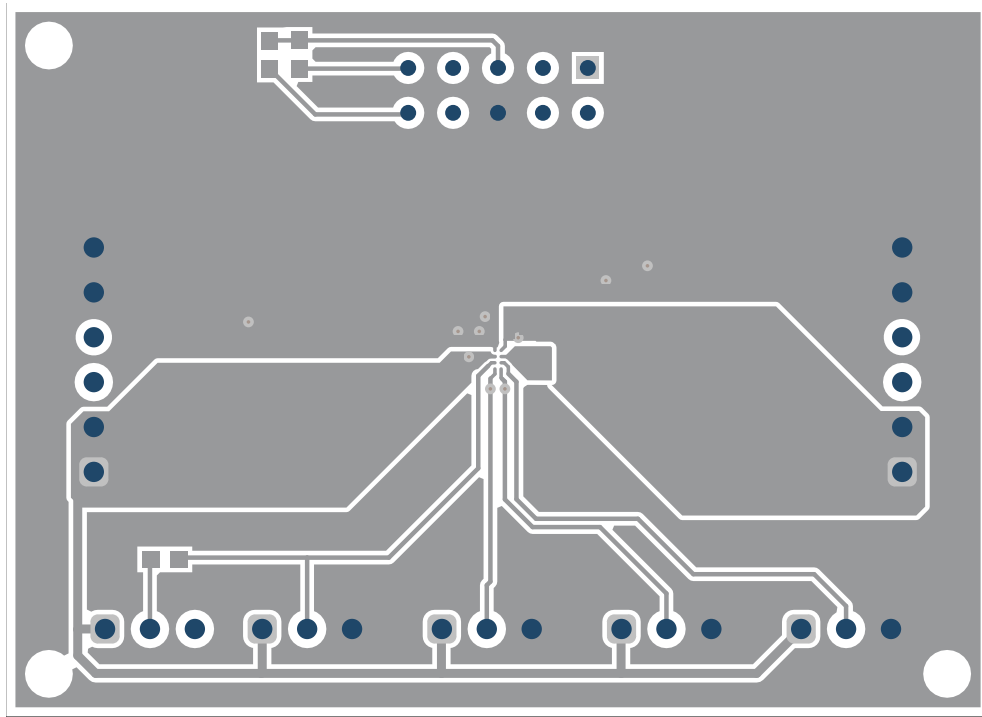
TPS6286x1EVM PCB - Bottom Layer (Top View)
